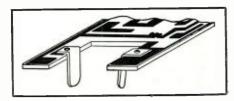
Details for making the battery clips to be mounted on circuit board.
